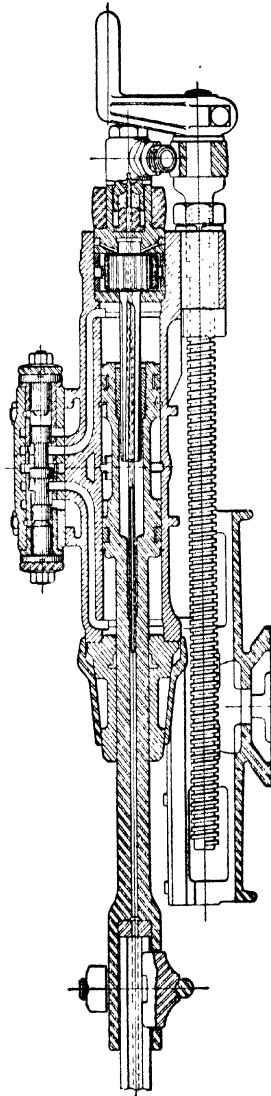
"Liteweight" Drill, with Water Attachment. Sullivan Machinery Co.
